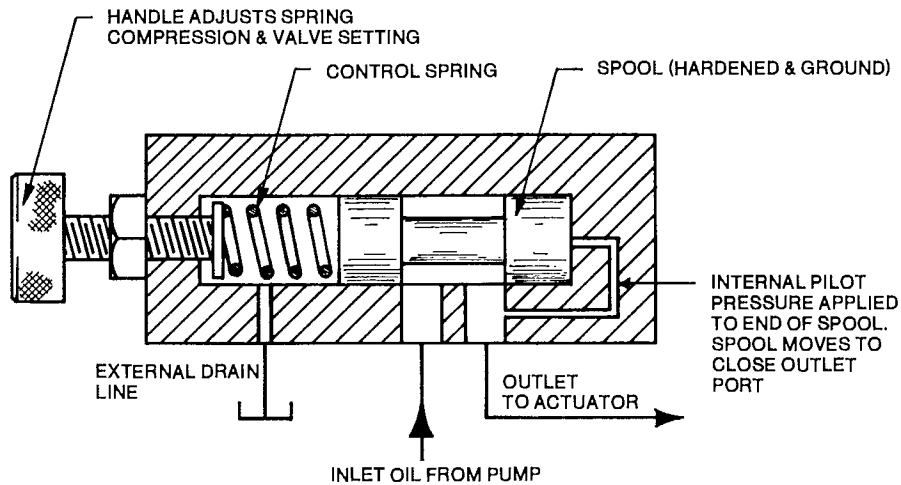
Normally open (pressure-reducing valve) pressure control valve
